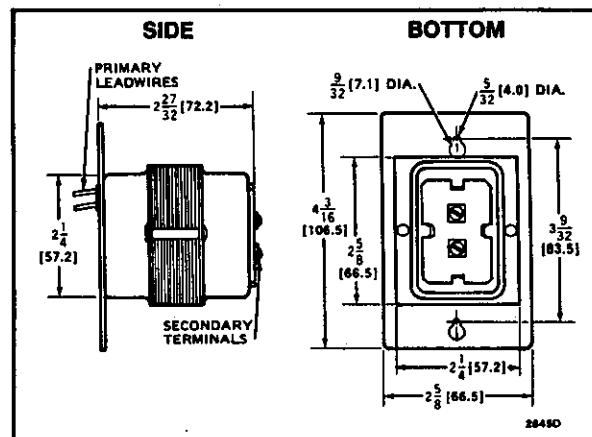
AT72D DIMENSIONS IN in. [mm IN BRACKETS] WITH 2X4 in. MOUNTING PLATE.
